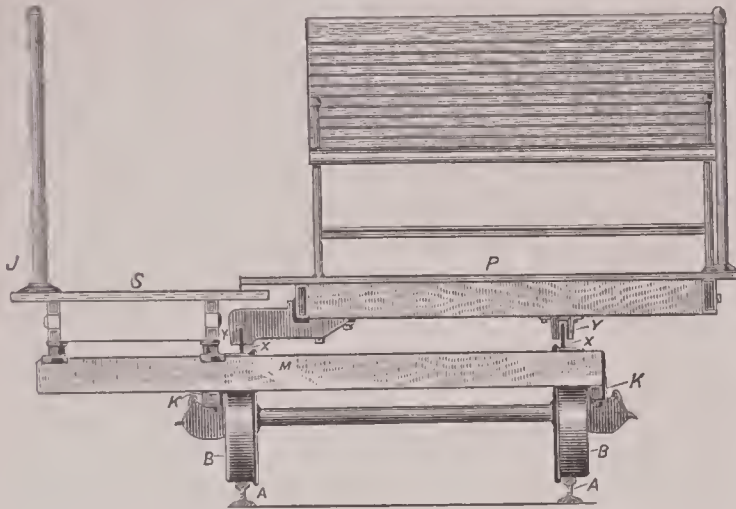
End view, showing both platforms: A, track-rails; B, wheels; J, hand-post; K, boxes; M, transverse frame of slow-moving platform; P, fast platform; S, slow platform; X, traveling flexible rail; Y, castings with slots for flexible rail.
